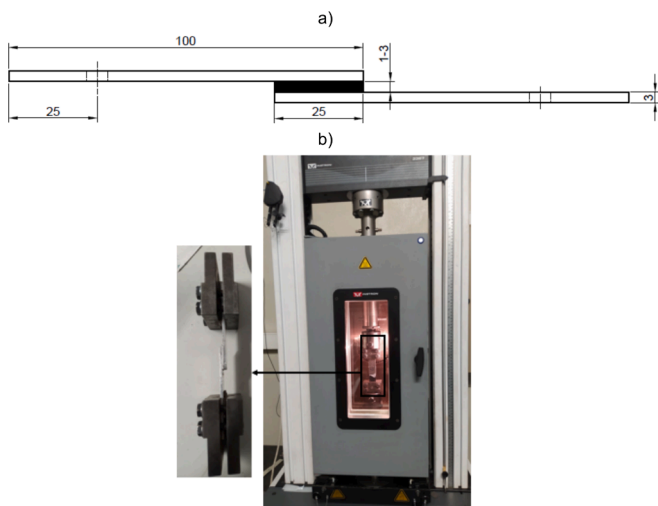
a) slj specimen geometry (dimensions in mm); b) test equipment for slj specimen clamps.
